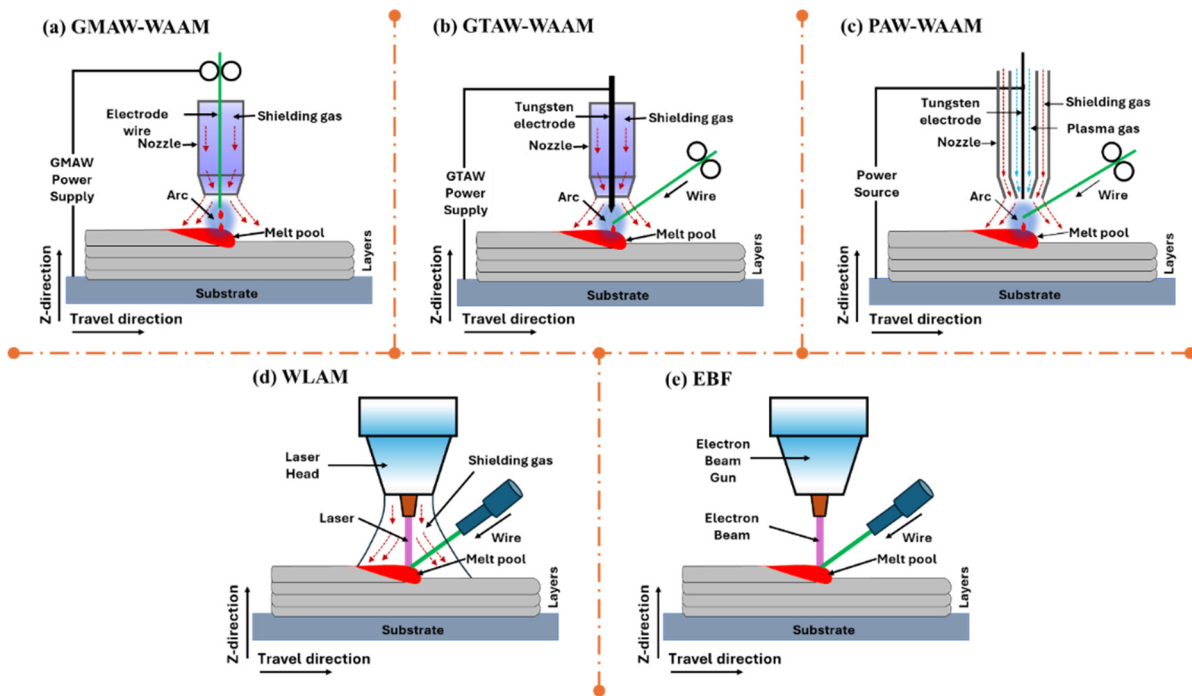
Wire DED Additive Manufacturing processes; (a) Gas Metal Arc Welding (GMAW), (b) Gas Tungsten Arc Welding (GTAW), (c) Plasma Arc Welding (PAW), (d) Wire Laser Additive Manufacturing (WLAM) and (e) Electron Beam Freeform Fabrication (EBF).
